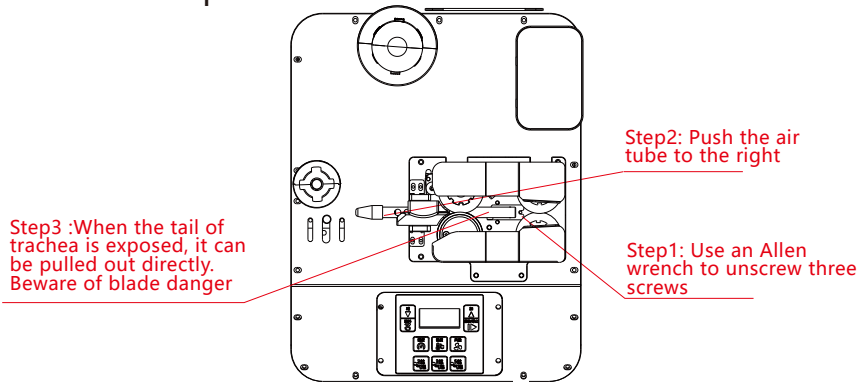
(Diagram of Air Tube and Blade Disassembly and Installation)
